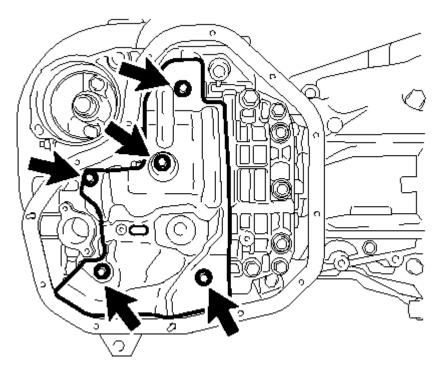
Location of Oil Pan Baffle Plate Bolts
